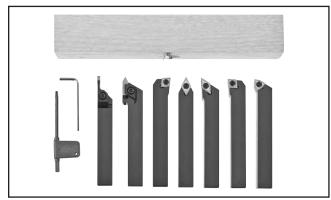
T10295 7-Pc. Indexable Carbide Tool Set.
